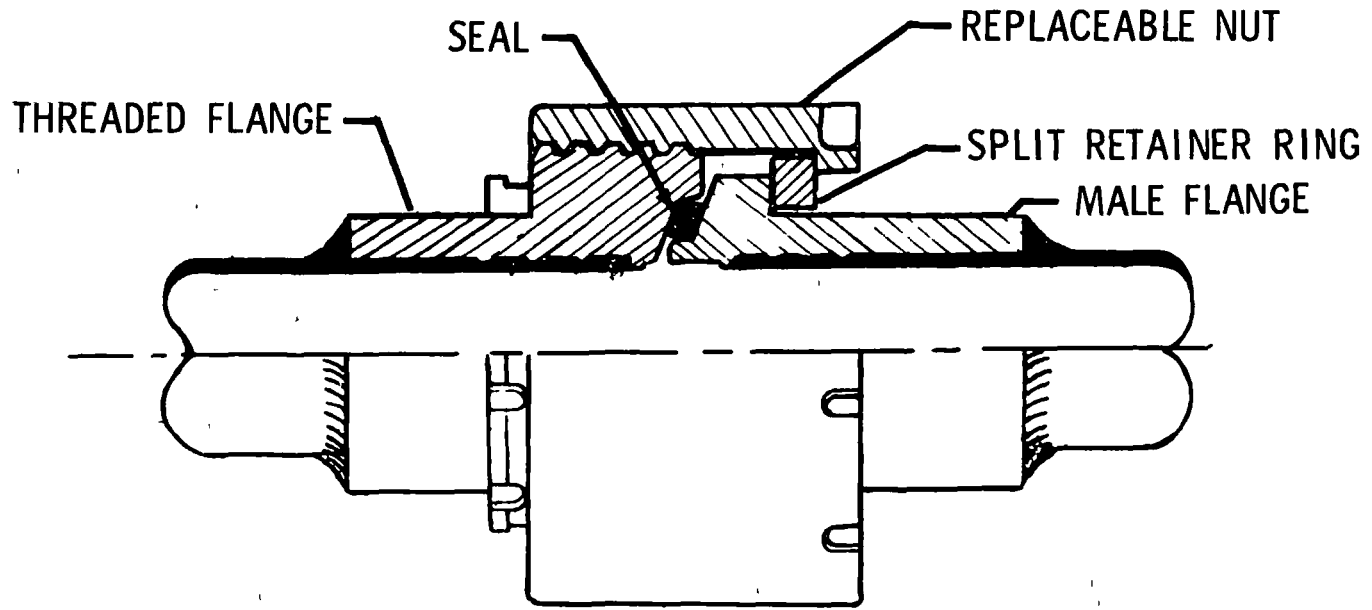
Reusable Tube Coupling with Replaceable Nut
